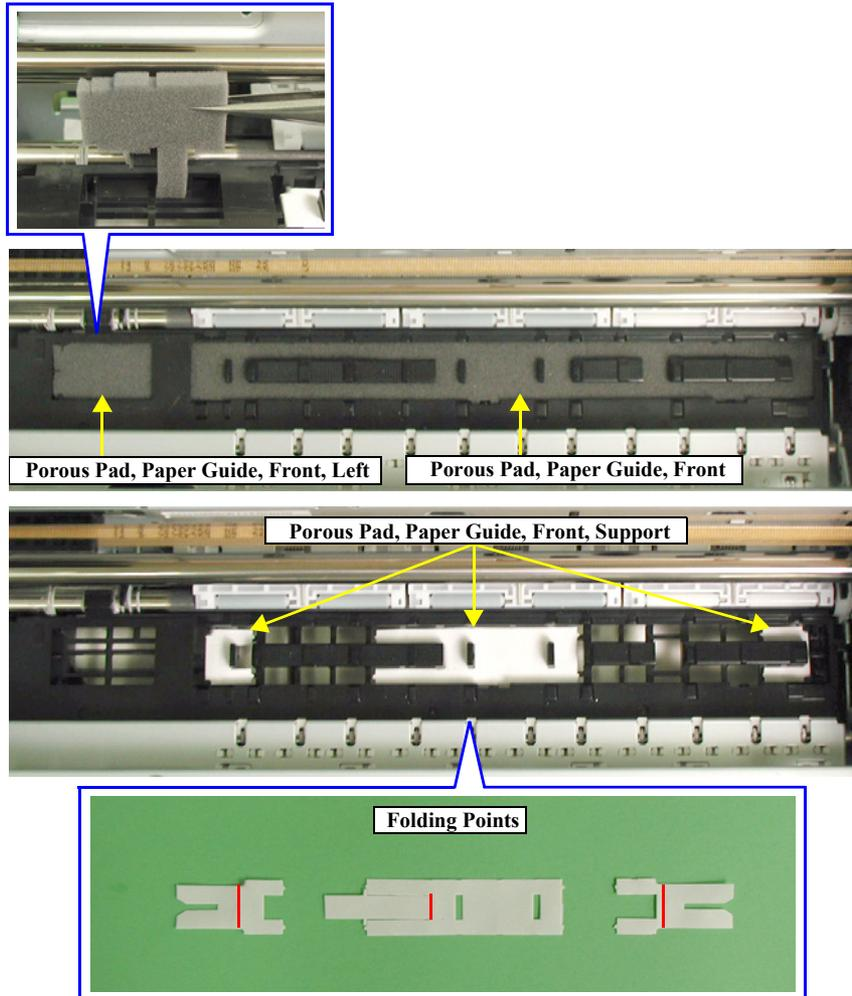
Porous Pad, Paper Guide, Front Removal
